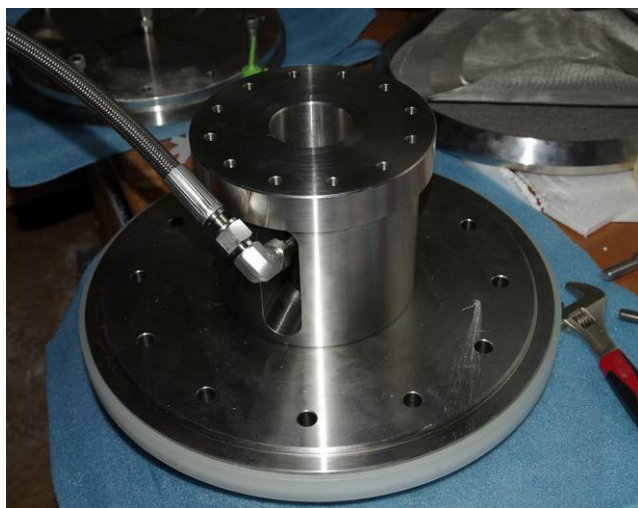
Column upper piston with support, piston tube and connecting tubing
